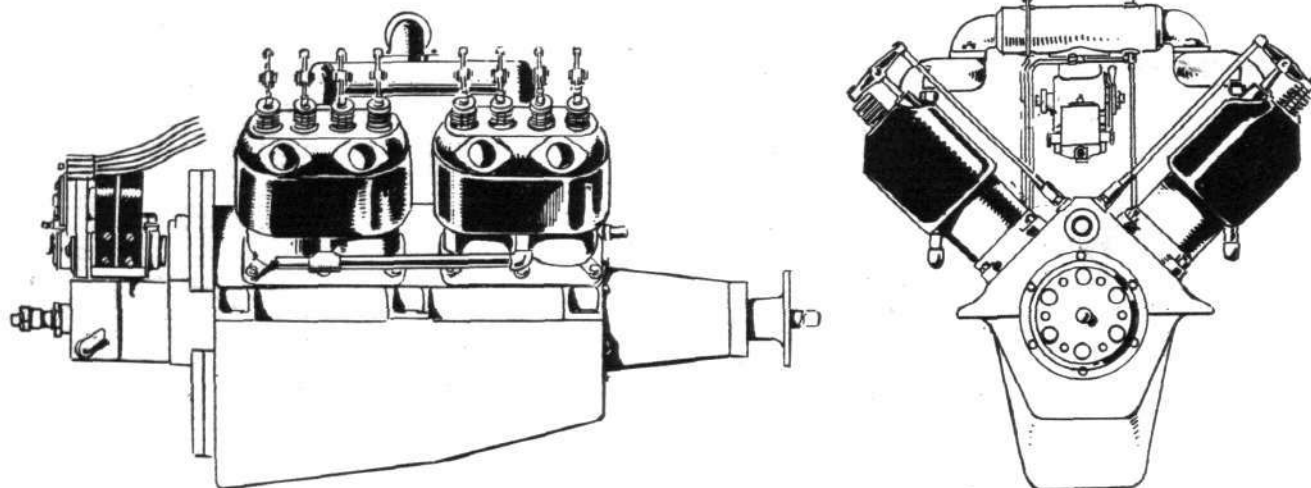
Side and end elevations of the 120 h.p. 8-cyl. "V" Maximotor.
